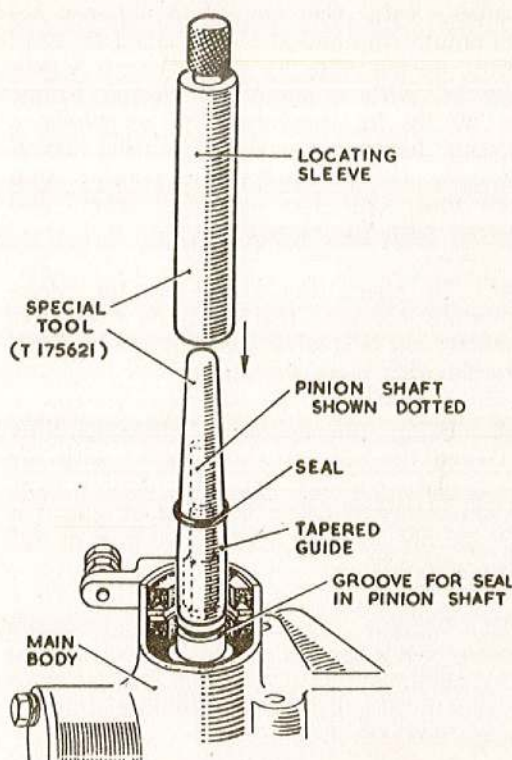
Use of tool T.175621 for fitting seal to pinion shaft
